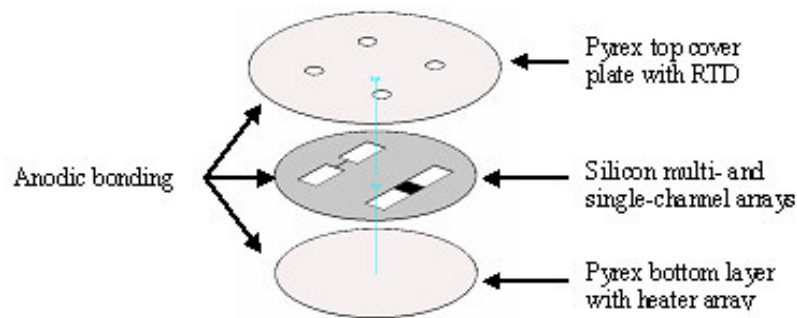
Exploded view of the bonded layers indicating the location of the heater pad, microchannels, and inlet/outlet plenums.
